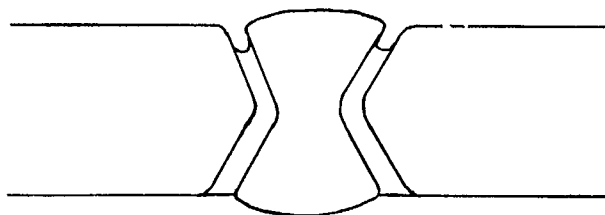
(b) - Schematic representation of the corrosion of the weld HAZ
